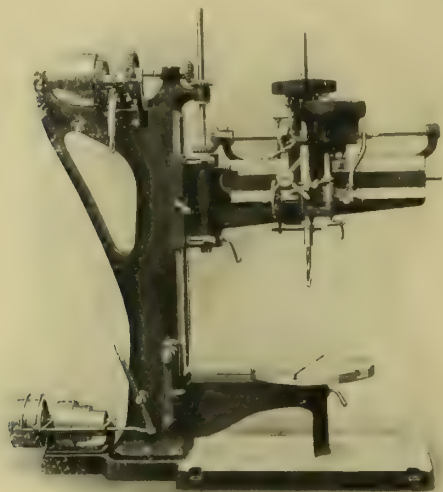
"EXPRESS" RADIAL DRILLING MACHINE.
